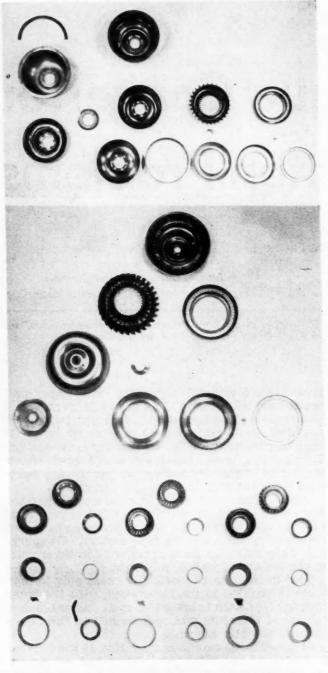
Current production units for torque converter of Chevrolet automatic transmission. At the top is the primary pump and its components; center, the turbine; and bottom, stators and secondary pump assembly and components
